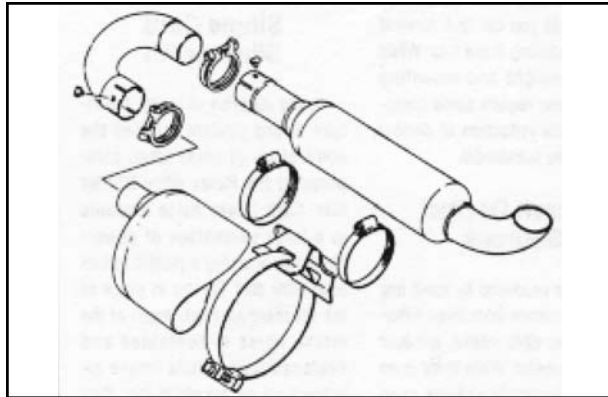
This after muffler kit is an easy bolt-on unit that can be installed in minutes with simple hand tools.
